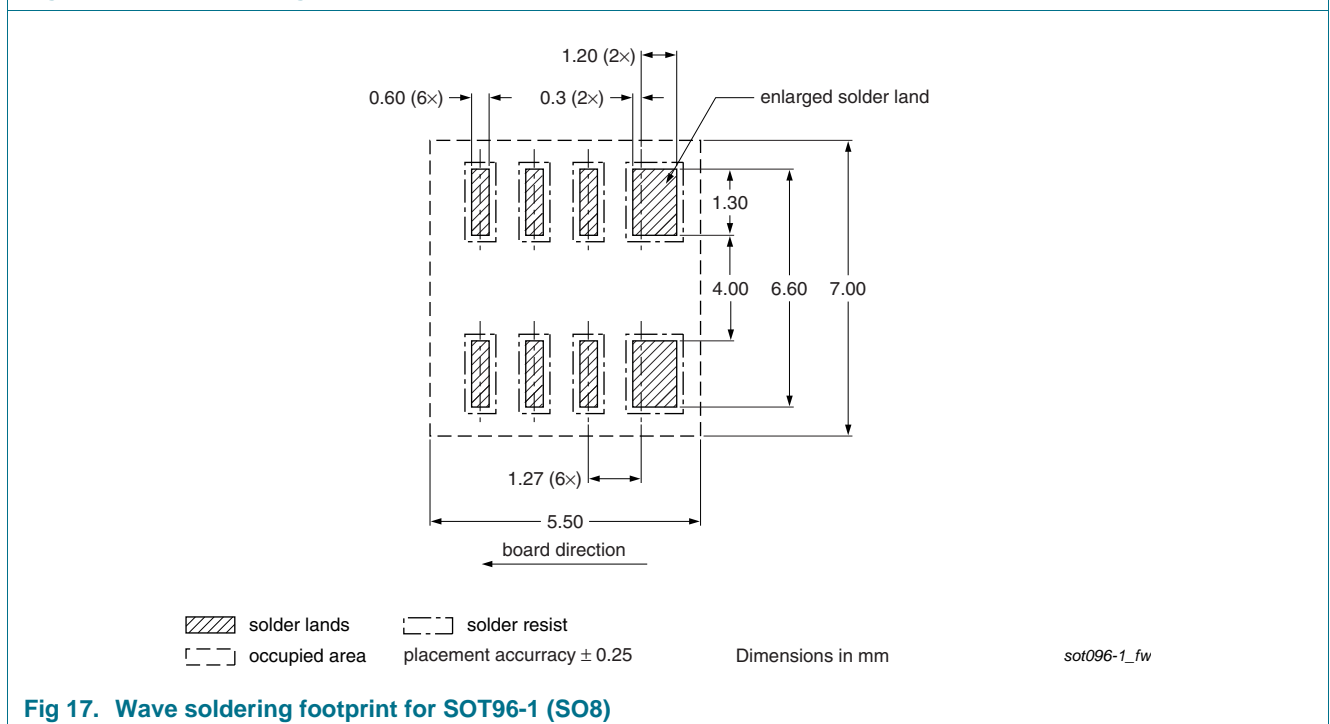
Wave soldering footprint for SOT96-1 (SO8)
